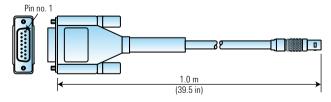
Mechanical dimension for DSUB 15-pin cable (87405C-103)
